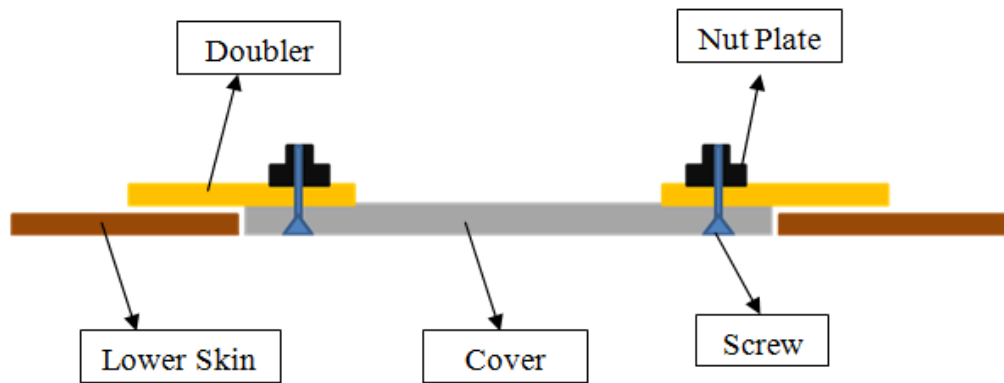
Doublers - Cover Connection Concept Used in Lower Skin
